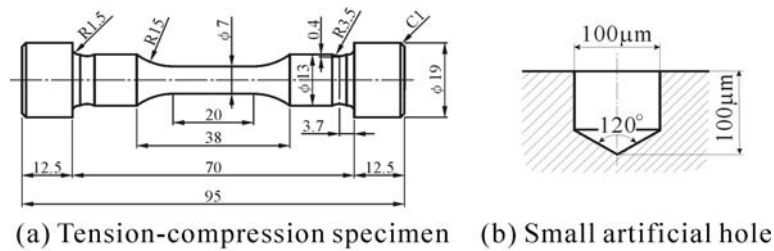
Dimensions of the fatigue test specimen and drilled hole
